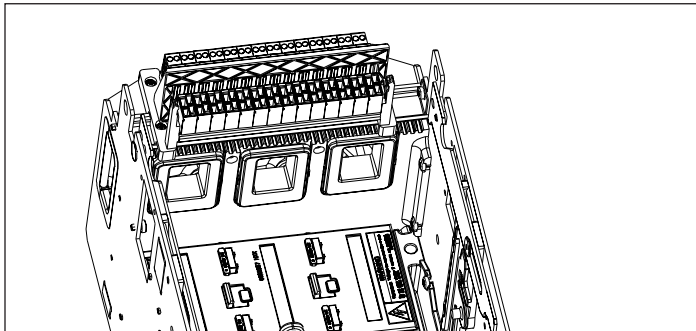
Breaker with some terminal blocks installed (NF frame).
